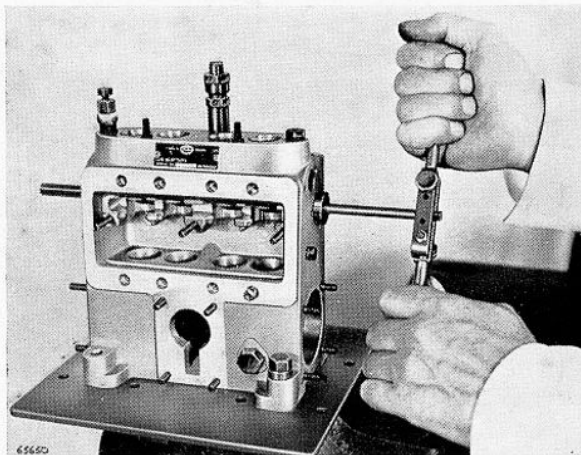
REAMING THE CONTROL ROD BUSHES—
